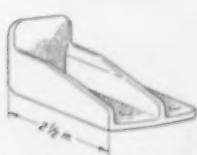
Investment Cast Part Which Would Not Have Been Satisfactory as a Sand Casting Because of Surface Finish Requirement of C-30
